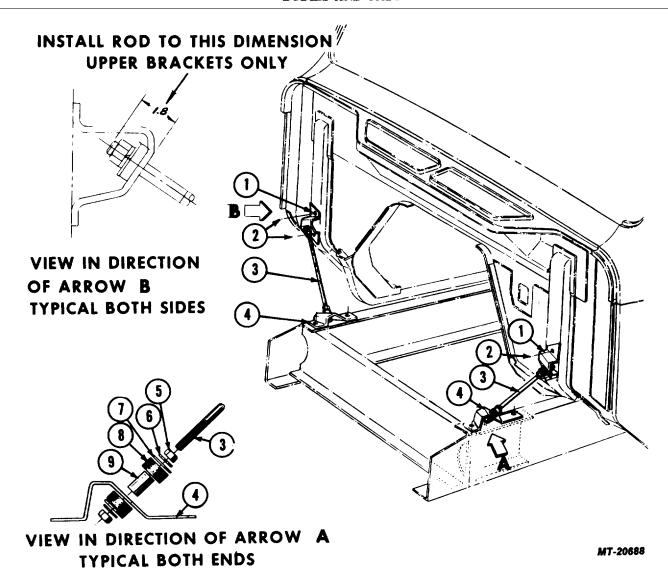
Stay Rod Details for 230 x 230 cm (90 x 90 inch) Cab
